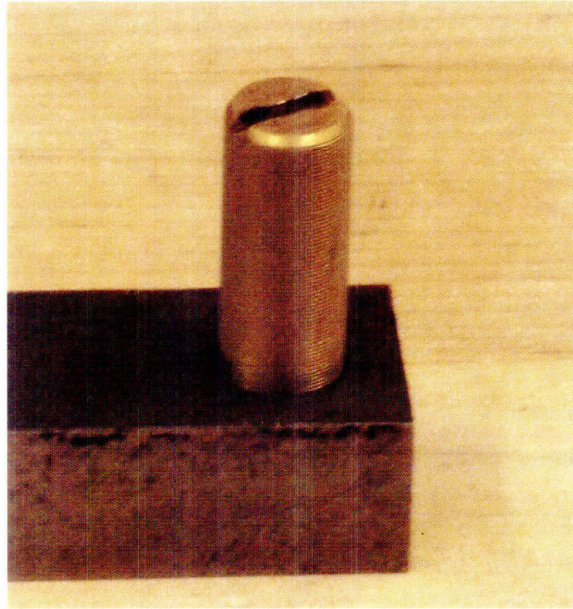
Titanium Nitride coated Invar screw screwed into a steel test fixture. The gold color is a property of the coating.
